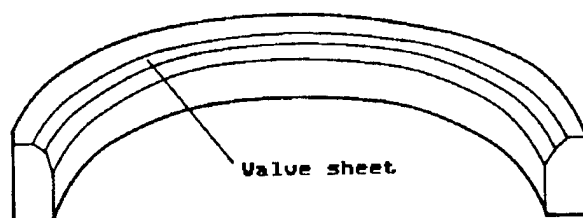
Valve Sheets for Large Diesel Engine, With Sheets Hardened by Laser Beam Irradiation (AVCO Corp.)
